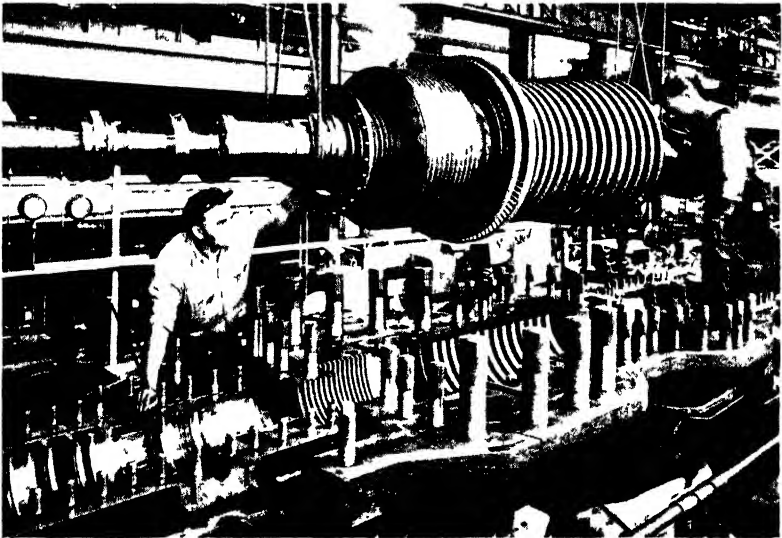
Westinghouse 50,000-kw, 3,600-rpm, superposed steam spindle
